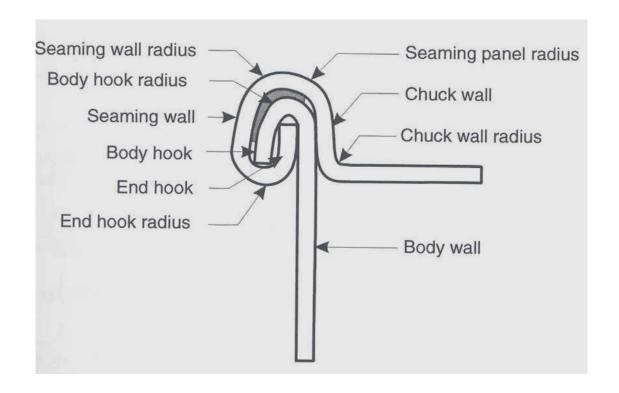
The double seam is a critical can component. Every angle, radius, and dimension must be correct to ensure a hermetic seal
